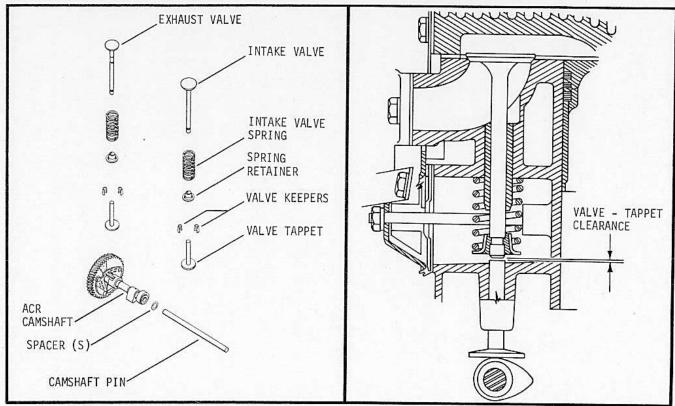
CAMSHAFT AND VALVE MECHANISM
